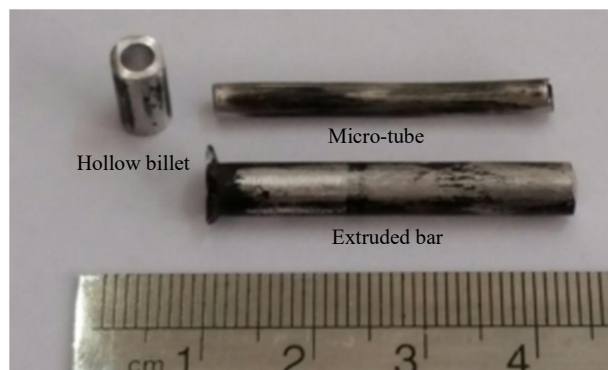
Pictures of ECAPed sample after extrusion, machined hollow billet and UFG micro-tube processed by micro extrusion
